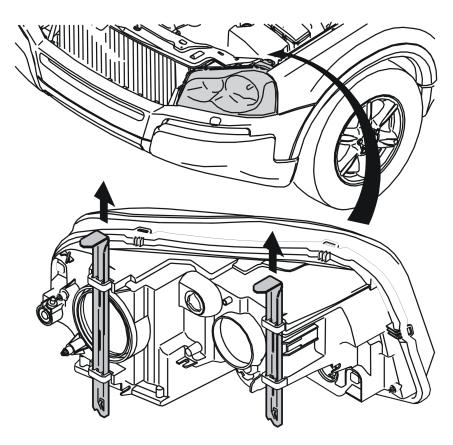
Pulling Locking Plate Straight Up Courtesy of VOLVO CARS CORPORATION
